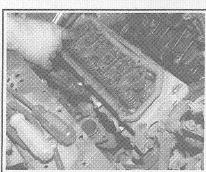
Removing the lower mounted head bolts. Notice the exhaust manifold has been removed
